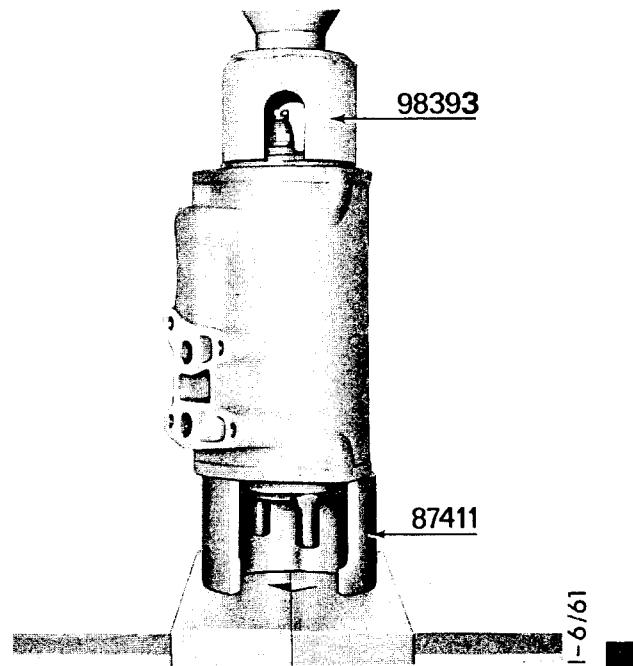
The cooling element is pressed downwards. This picture shows a part-flow oil cooler
